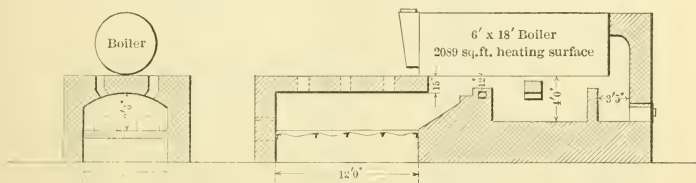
A TAN FURNACE WITH SIX FEED HOLES ]
